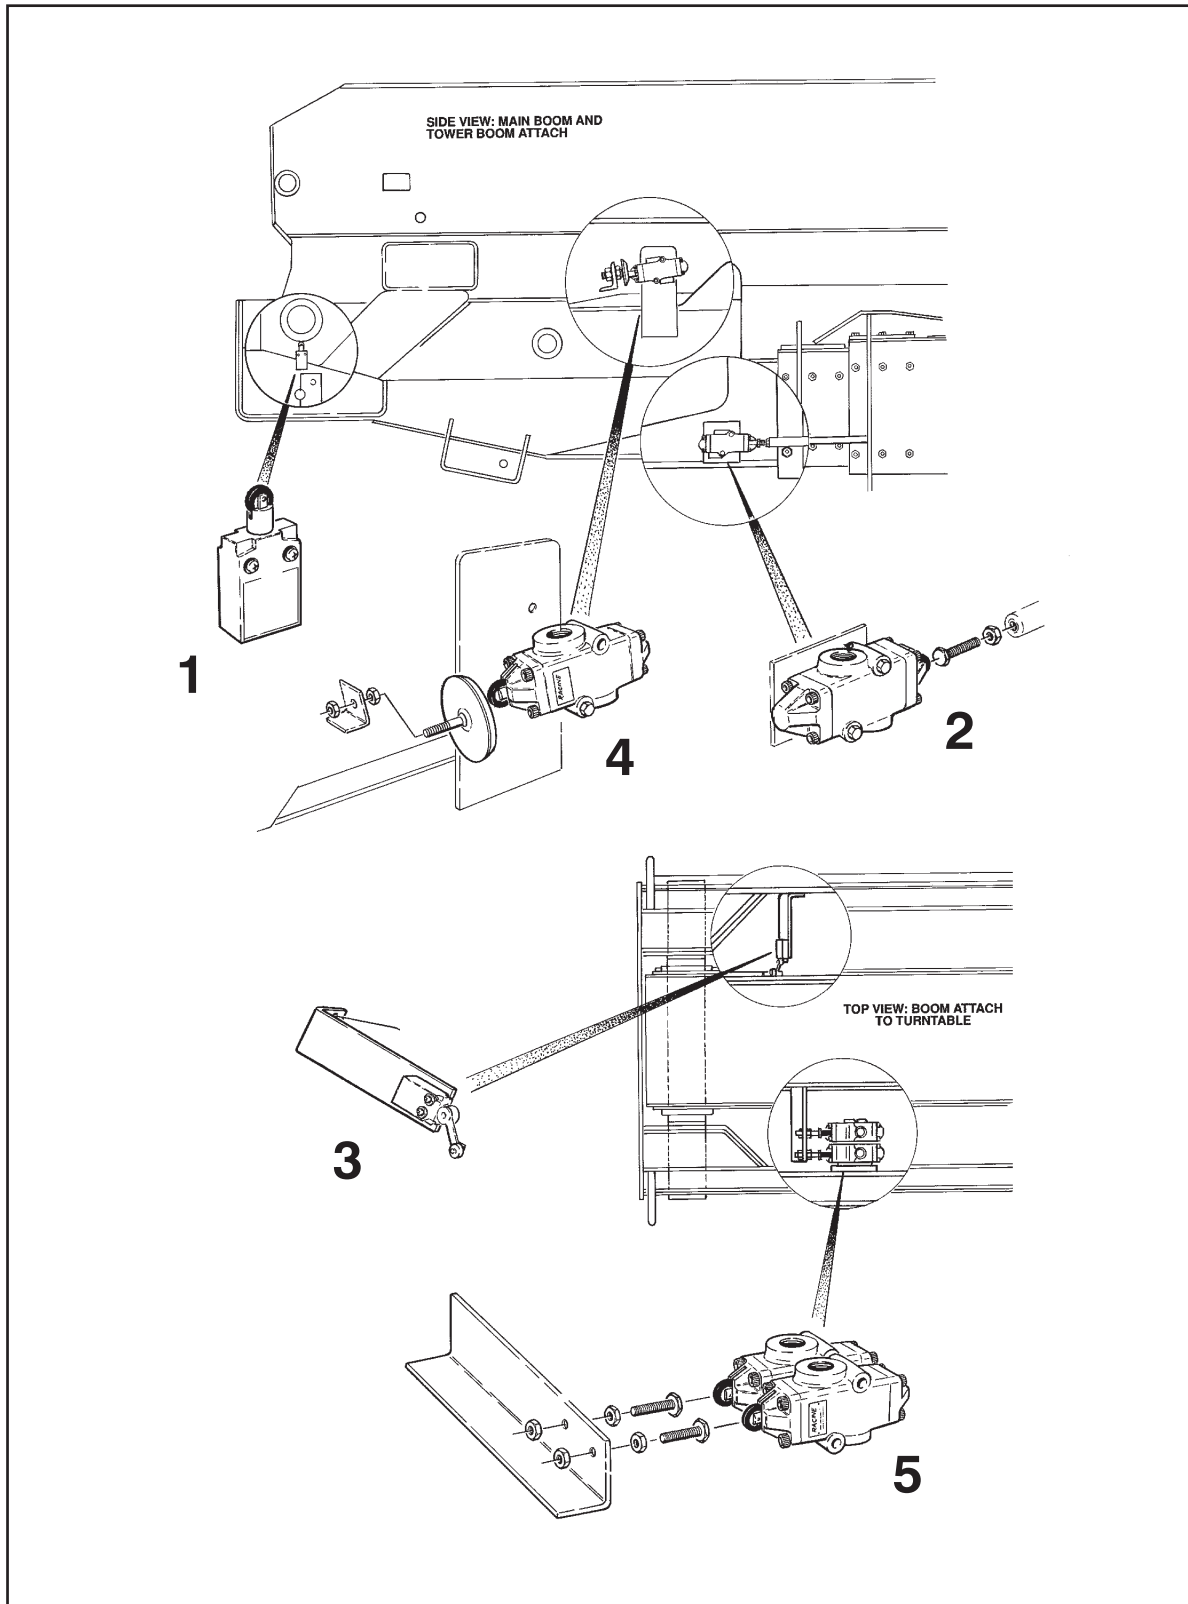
Boom Mounted Limit Switches and Valves Installation
